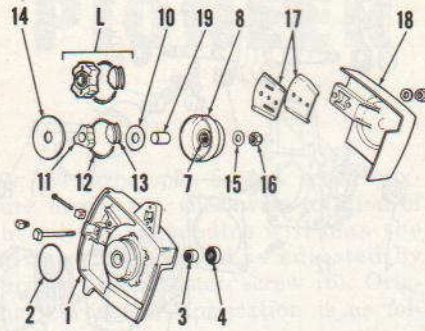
Exploded view of main bearing housing and clutch typical of type used on models with manual chain oiler. Metal side of seal (4) should be toward outside with lip in toward main bearing (3). Clutch shoes, driver and spring shown at (L) is used on 1200 models.
